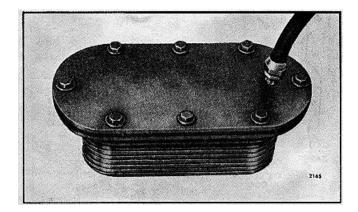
Oil Cooler Core Prepared for Pressure Check Pressure Check Oil Cooler Core
